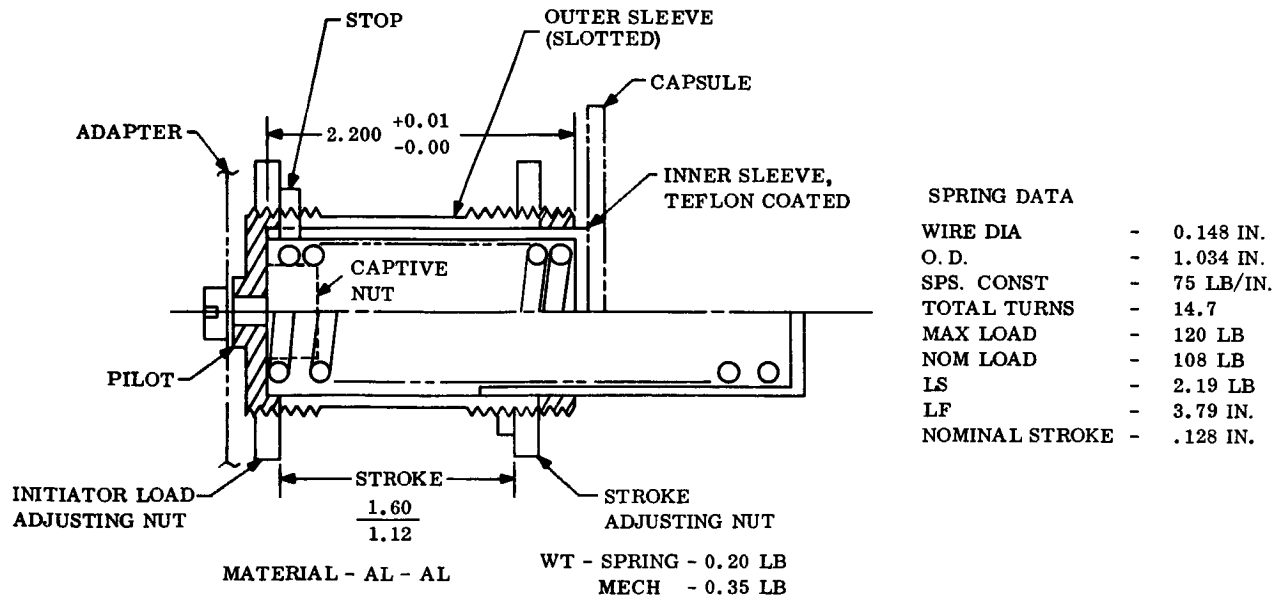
Capsule Separation Adjustment Spring Assembly
